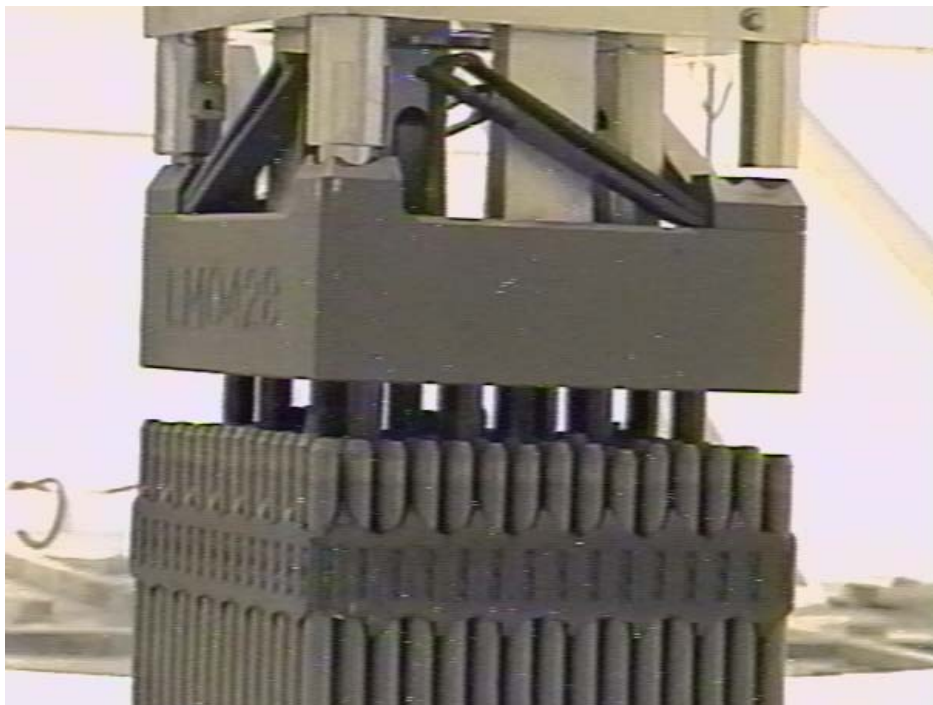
Fuel assembly V-08 tops of fuel rods appear quite even.
